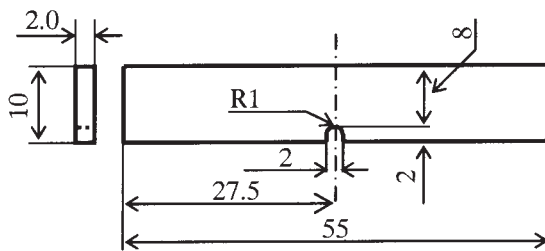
Geometry of the specimen for the Charpy impact test (in mm)
